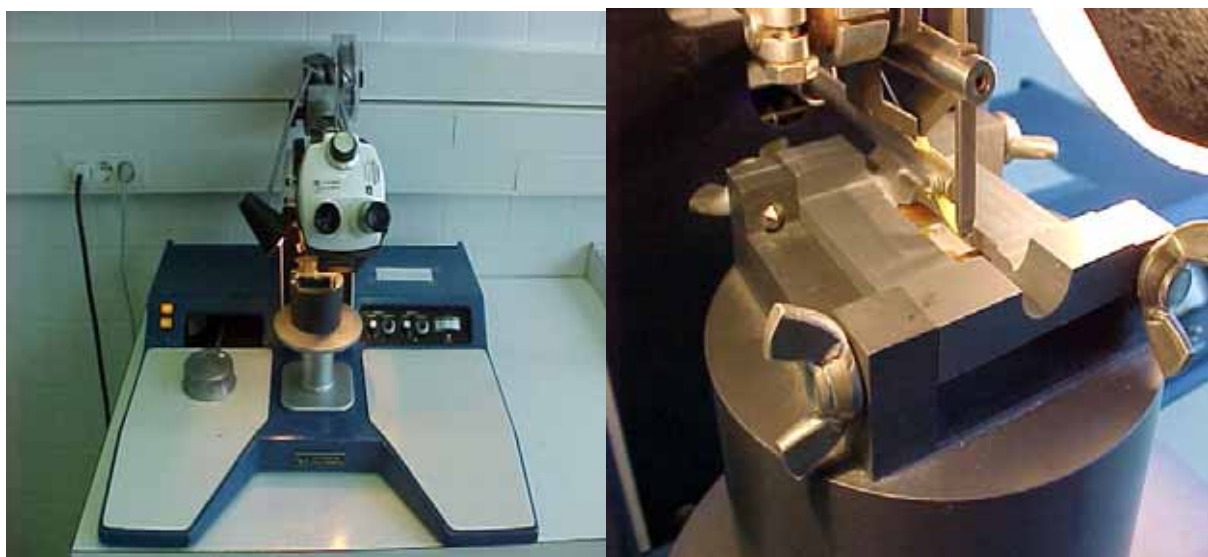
Wire bonding machine (left) and sensor soldering (right)
